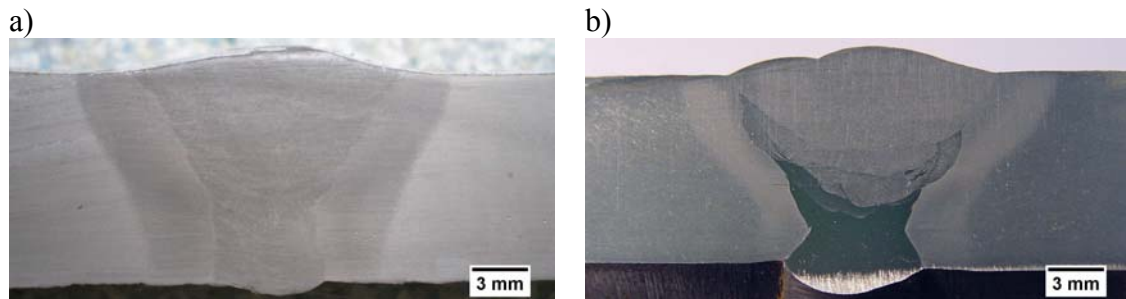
Macrostructure of joint welded by: a) P 24-IG filler metal b) EPRI P87 and P 24-IG filler metals, Nital etching
